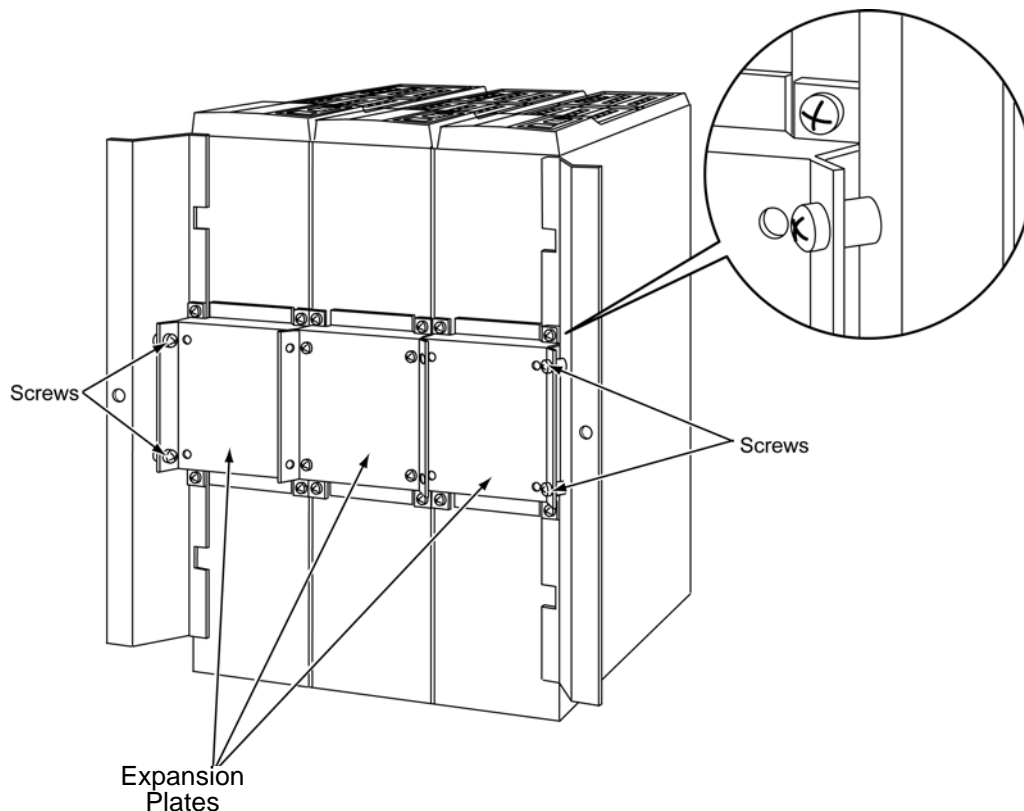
Install Additional Brackets from CHS2U JOINT BRACKET KIT
